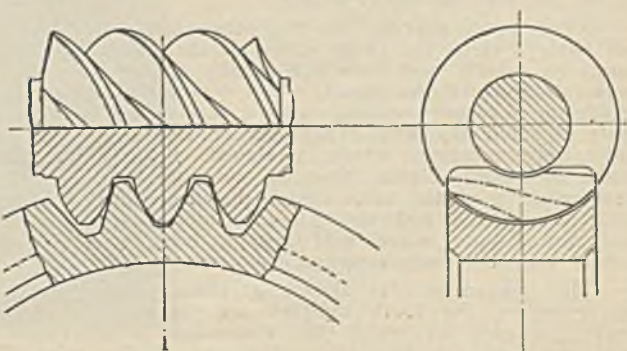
D.B.S. Extended Contact Worm Gear.
